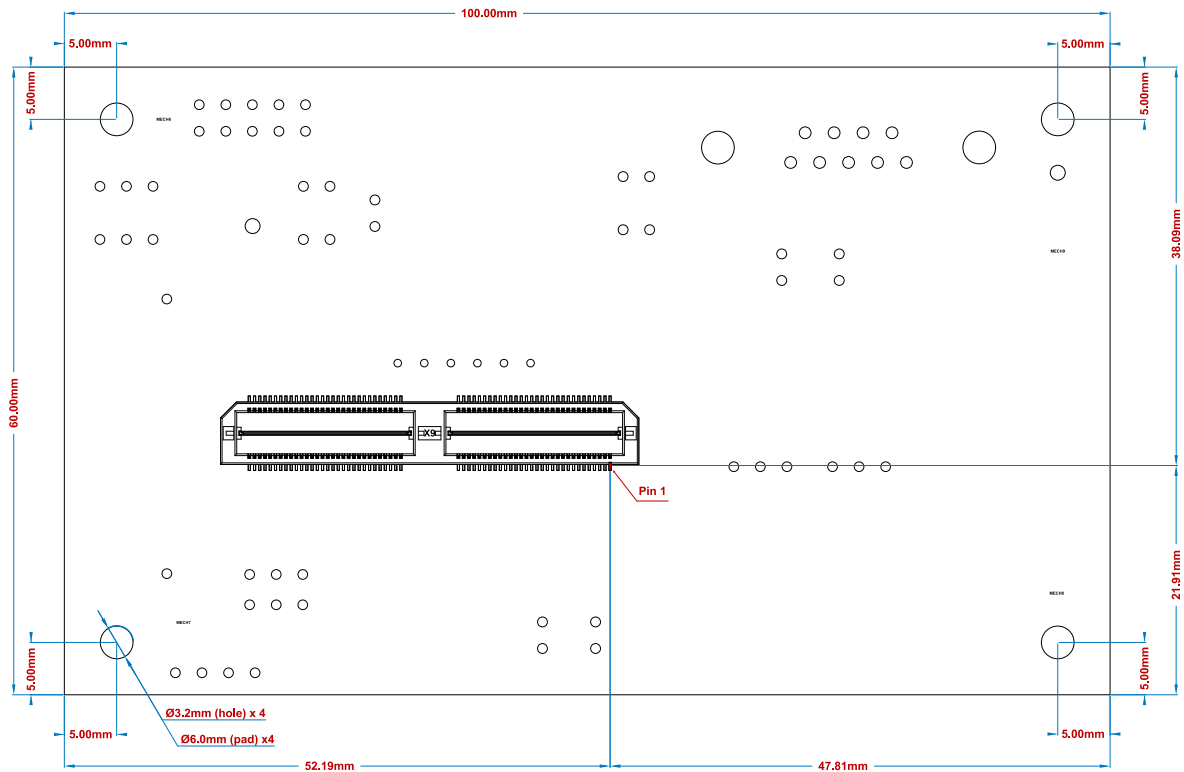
Apalis iMX8 Mezzanine Board Mechanical Drawing – Bottom Side
